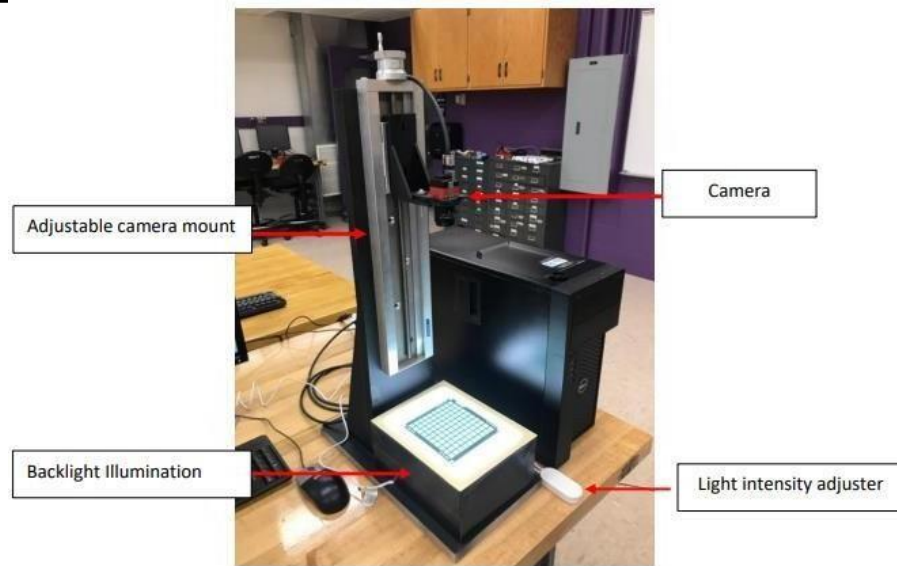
(The PCB defect detection system, Display to the left of the image, Backlight and the camera fixture at the center, and the central processing unit to the right)
